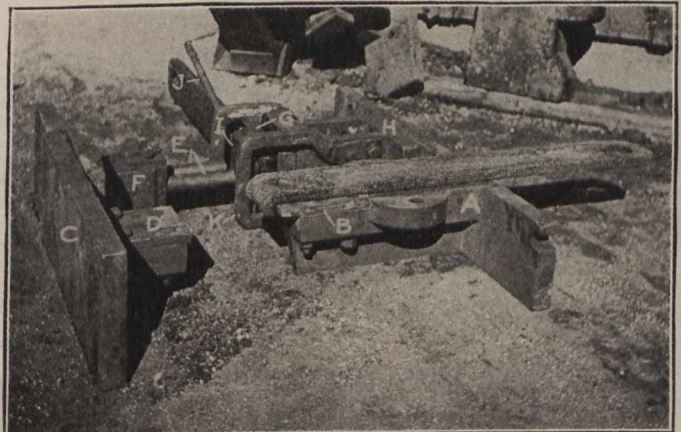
Second and Third Operations of Trimming and Punching the Ends of the Car-coupler Pocket.
